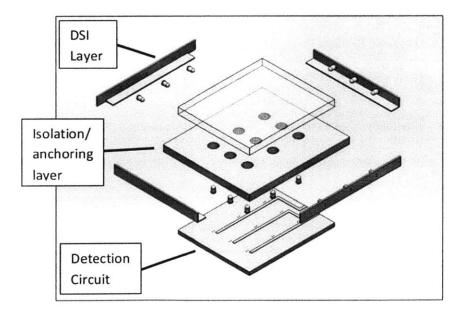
Exploded view of the final assembly. Three assembly layers can be seen: one layer for the DSI touch surface, the bottom layer for detection circuitry, and a middle layer to limit infrared scattering and simplify the assembly process.
